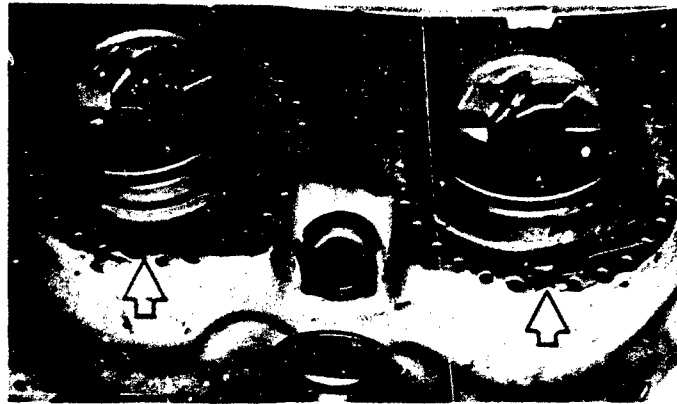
Swirl-Cup Mounting Spacer Cracking.
